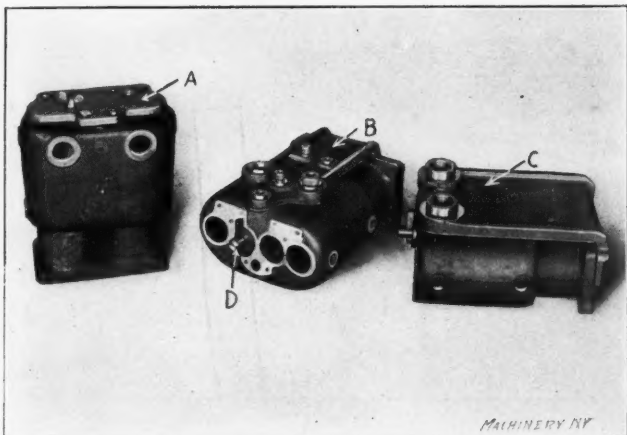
Jigs for Drilling the Various Small Holes in the Cylinder Castings
